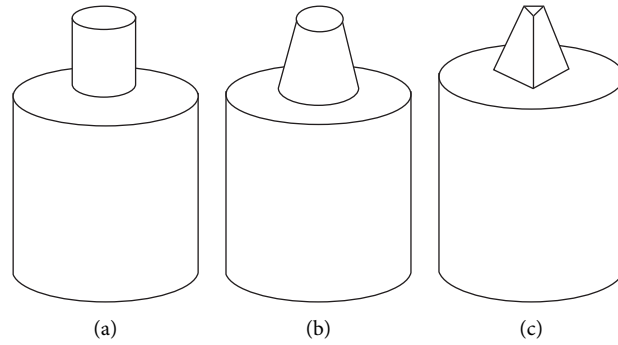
FSW tool. (a) Cylindrical tool, (b) Taper tool, and (c) Triangular tool.
